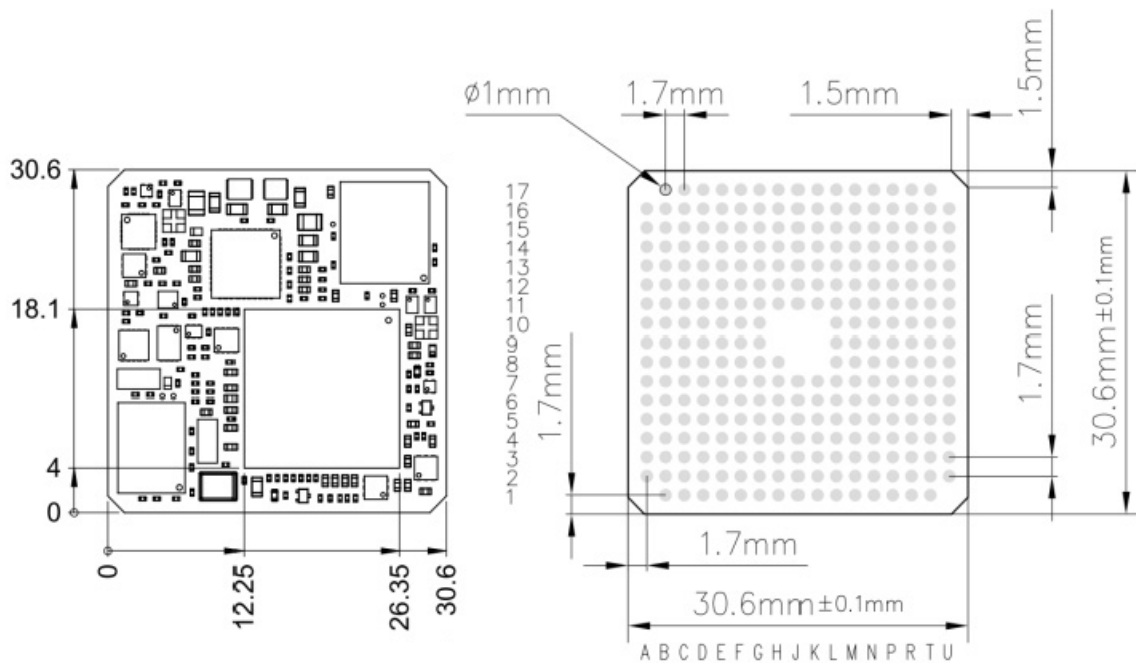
TQMa117xL dimensions, top view (left) and TQMa117xL dimensions, top through view
